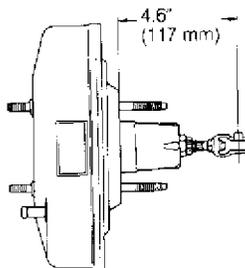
Adjusting Power Brake Booster Push Rod Length
